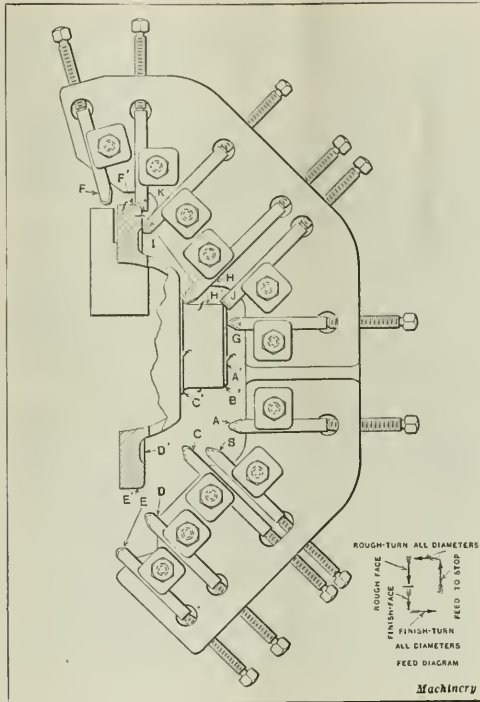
Multiple Tool-holder which carries all the Tools used in the First Chucking
